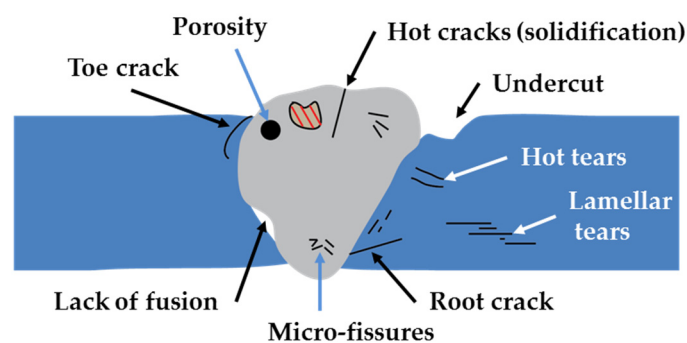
Schematic representation of typical weld defects (adapted from [80]).
